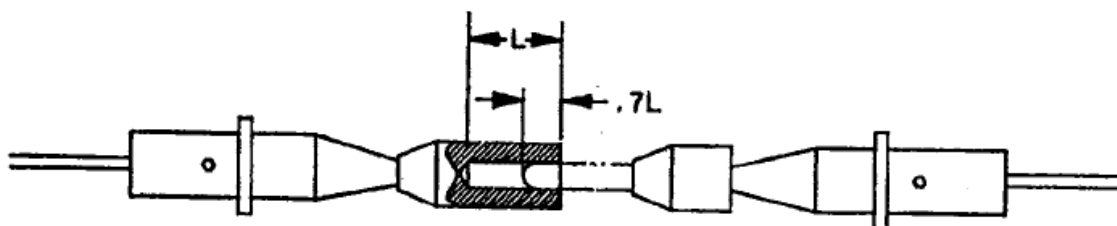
Depth of engagement, contact engagement and separation force test.
